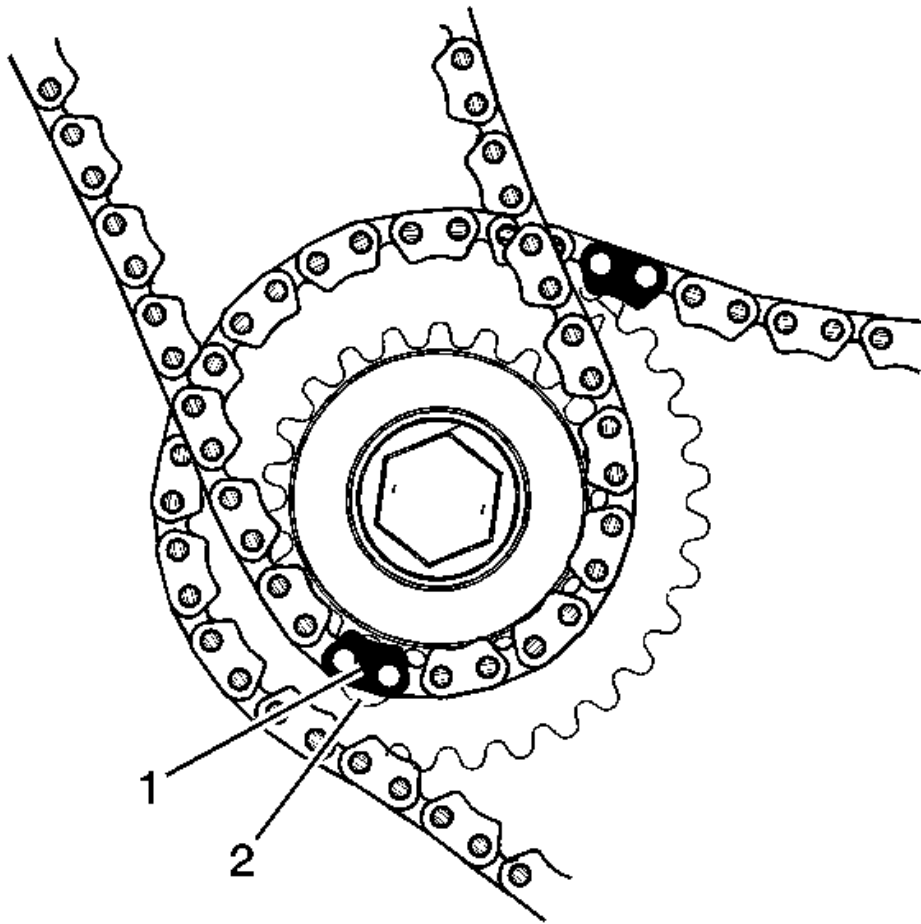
View Of Crankshaft In Stage 2 Timing Drive Assembly Position
